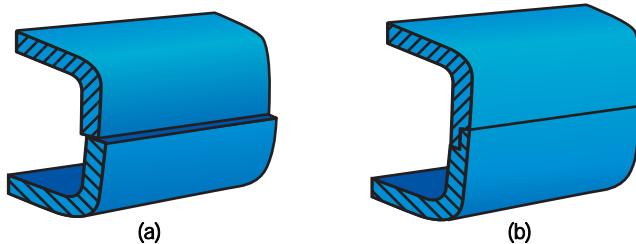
Butt joints (a) are difficult to align; matching half-tongue and groove (b) align the two parts within normal tolerances
